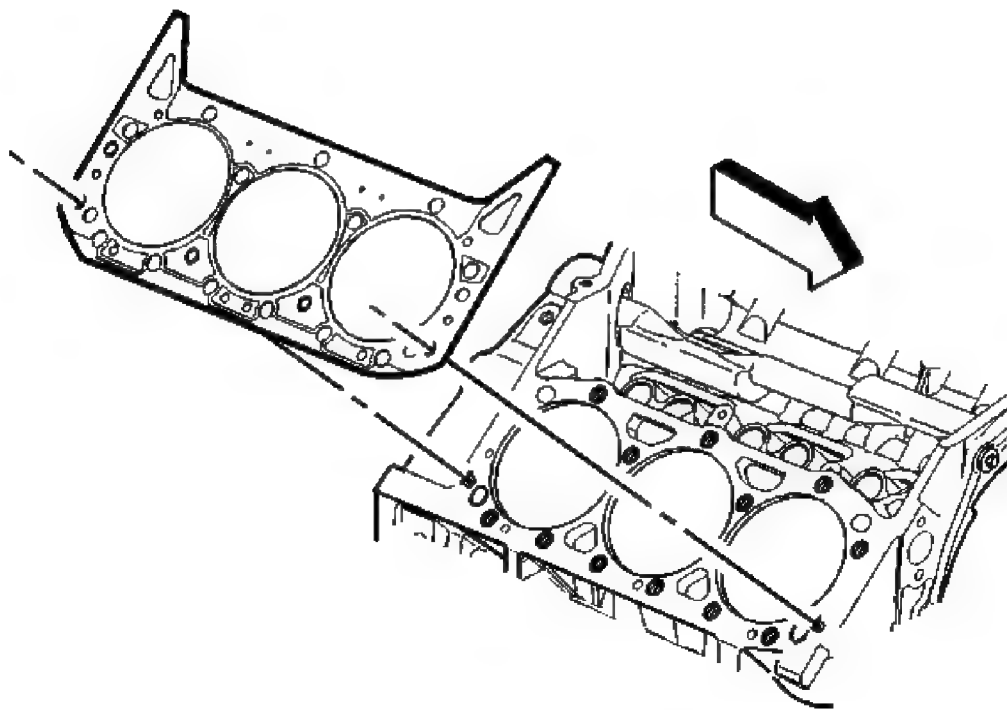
View Of Cylinder Head Gasket And Alignment Pins - Right
